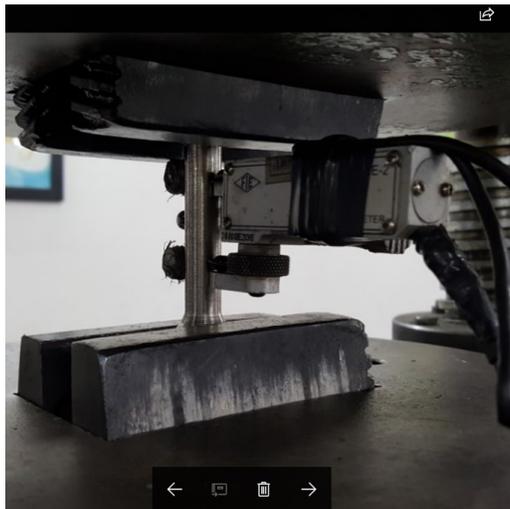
Prepared specimen for All weld Test
